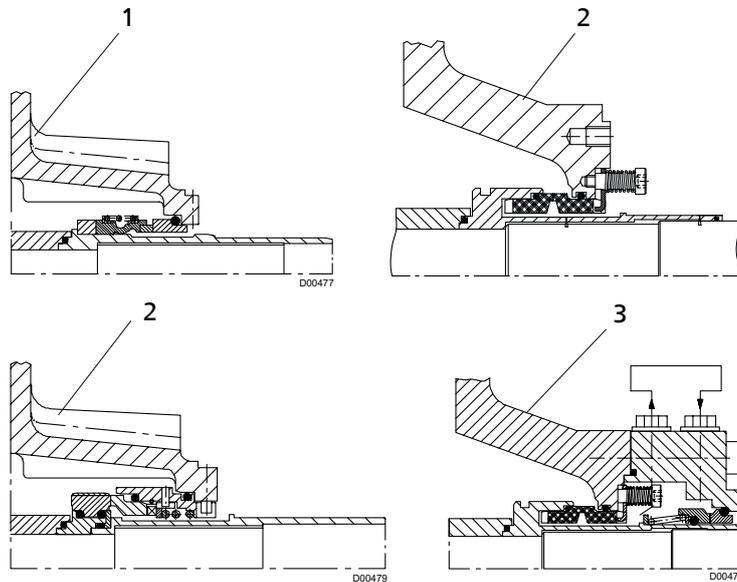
Mechanical seals in conical seal chamber (A-type)
